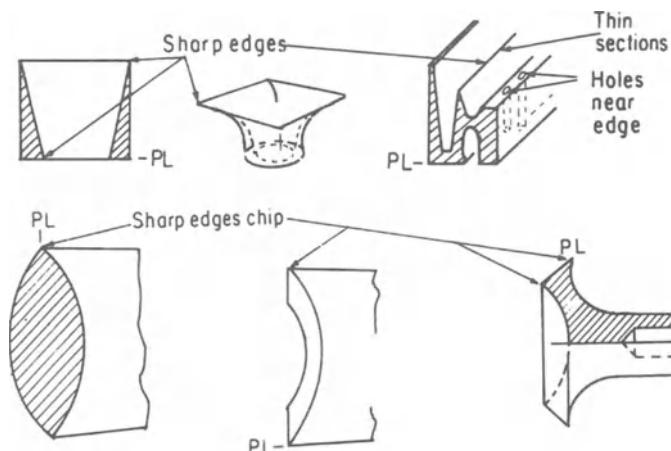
Avoid part cross sections that are so thin that they will be prone to cracking, sharp edges that will chip or break, and holes near enough the edges to cause them to chip. Sections should also not be so thin that melt will flow and weld in their thin edges. Certain plastics are prone to this type of action.
